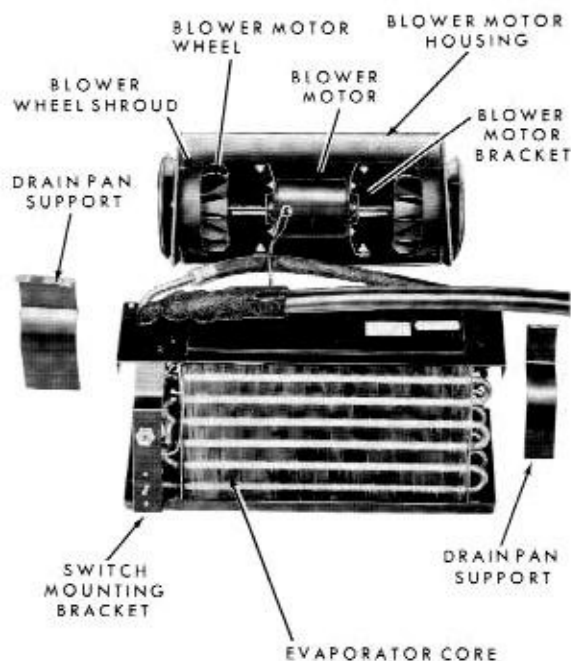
B-5—Evaporator Housing-Disassembled—(61MT-8806)
